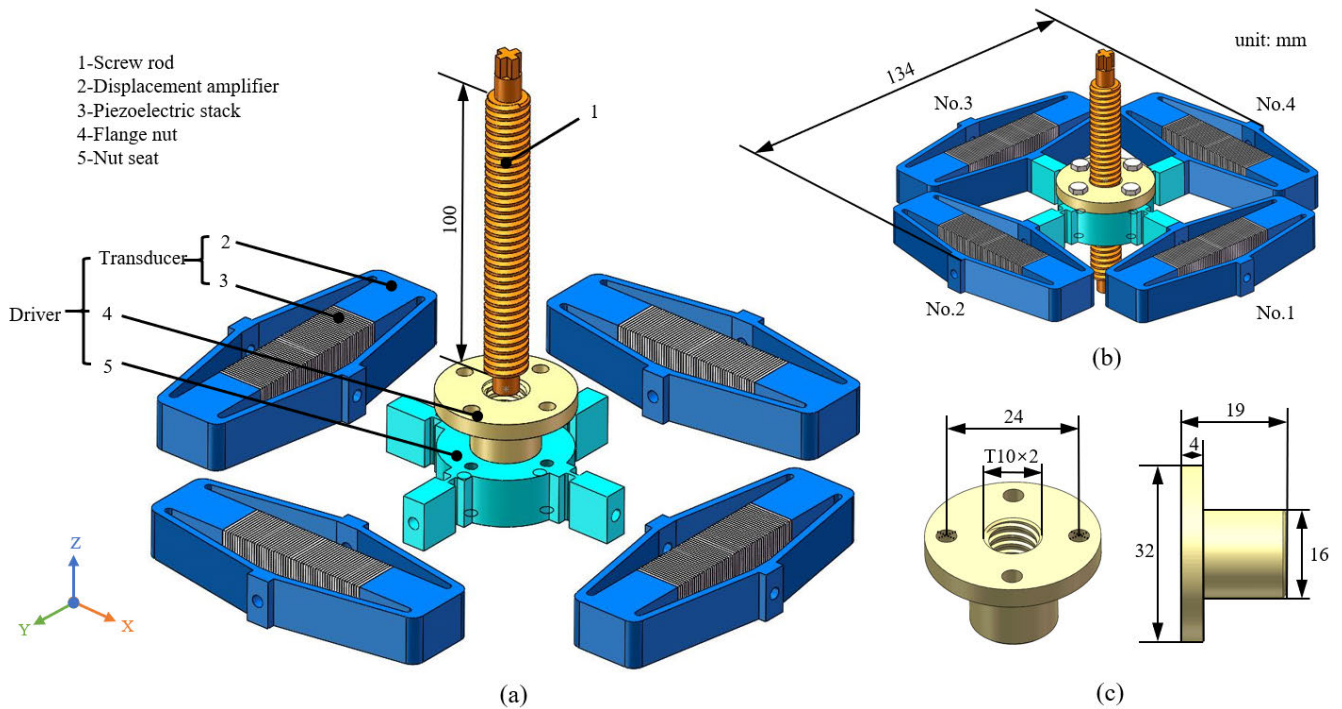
Structure of the motor. (a) Explosive view. (b) Assembly view. (c) The size of nut.
